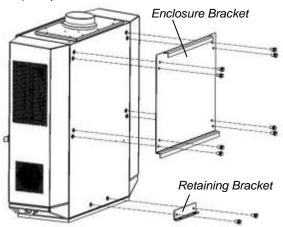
Attaching Encloser bracket and Retaining bracket to back of Charger
